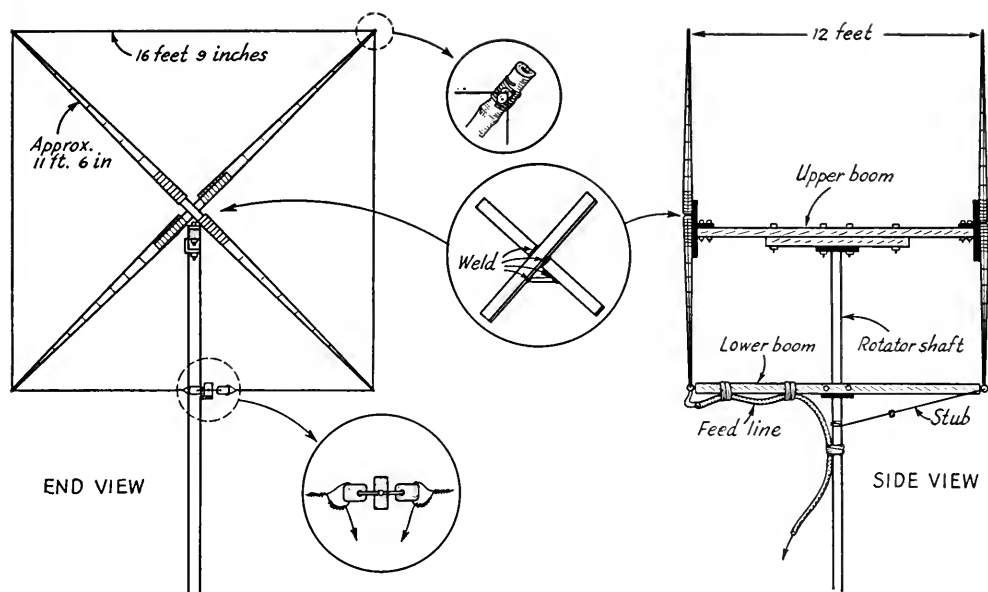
End and side views of 20-meter quad. Upper insert shows method of fastening antenna wire to support arms. Center insert shows construction of support-arm mounting bracket. Lower insert shows method of attaching feed line and stub to the center insulators. Two small egg insulators are used, fastened to end of lower boom as shown with a small nail.
